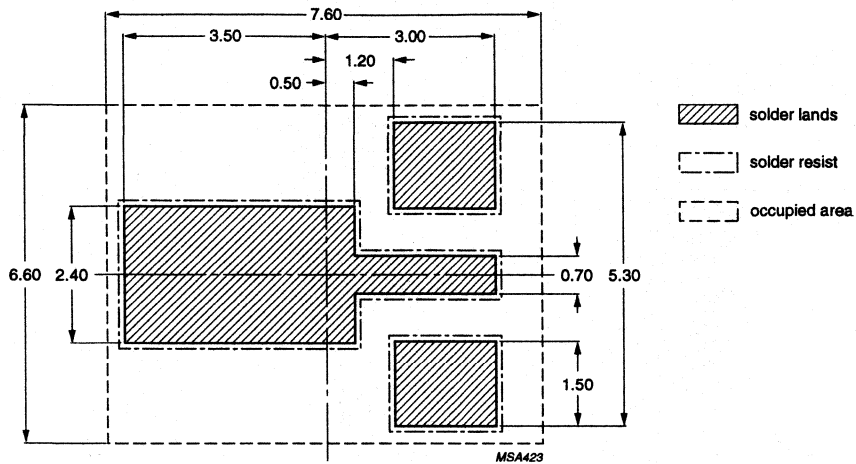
Reflow soldering footprint for SOT89; typical dimensions.
